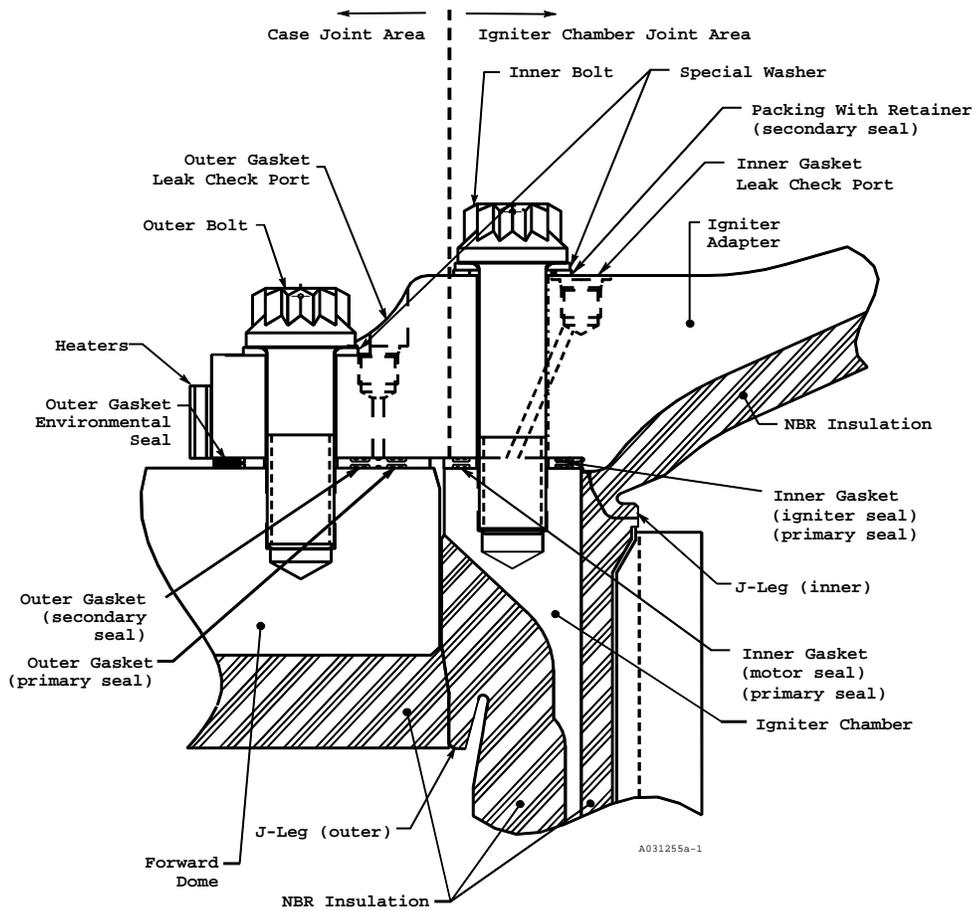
Igniter Adapter-to-Chamber Joint and Igniter Adapter-to-Case Joint
